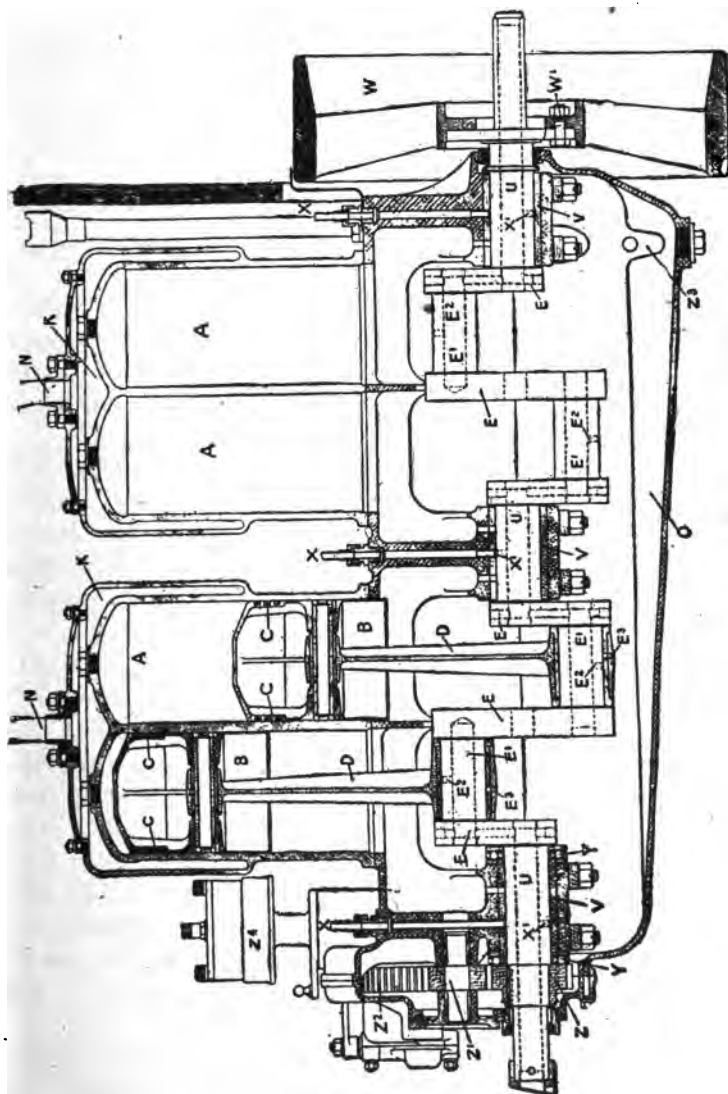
LONGITUDINAL SECTION OF A 35 H. P. ENGINE.
